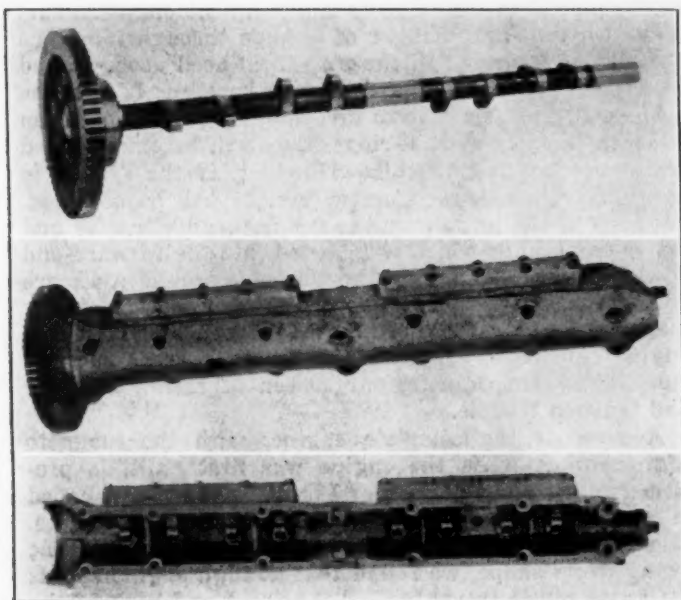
ONE OF THE CAMSHAFTS AT THE TOP WITH THE COMPLETE CAM HOUSING UNDERNEATH AND AN INTERIOR VIEW OF THE HOUSING WITH THE BRONZE CAPS FORMING CAMSHAFT BEARING AT THE BOTTOM
